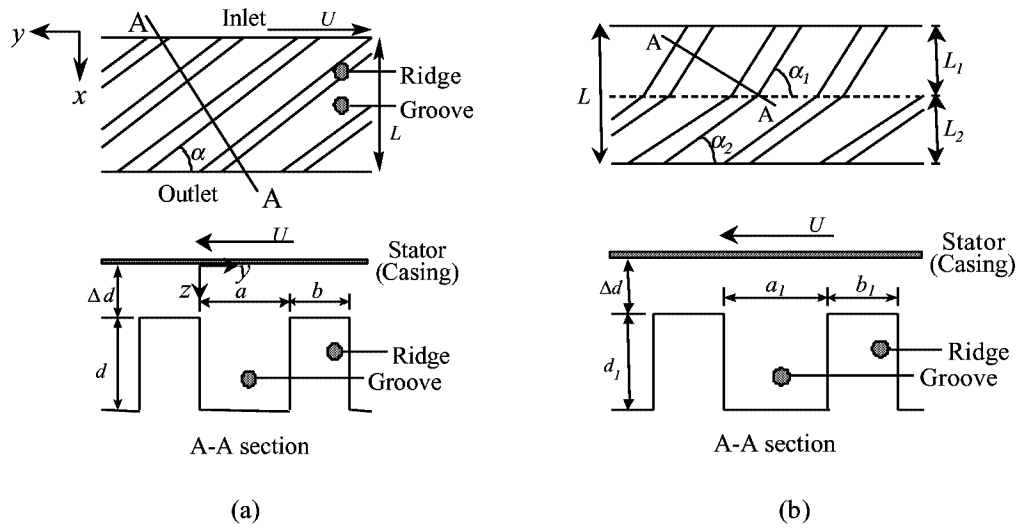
Geometry of helical-type drag pump (Q3D): (a) rotor 1; (b) rotor 2.
